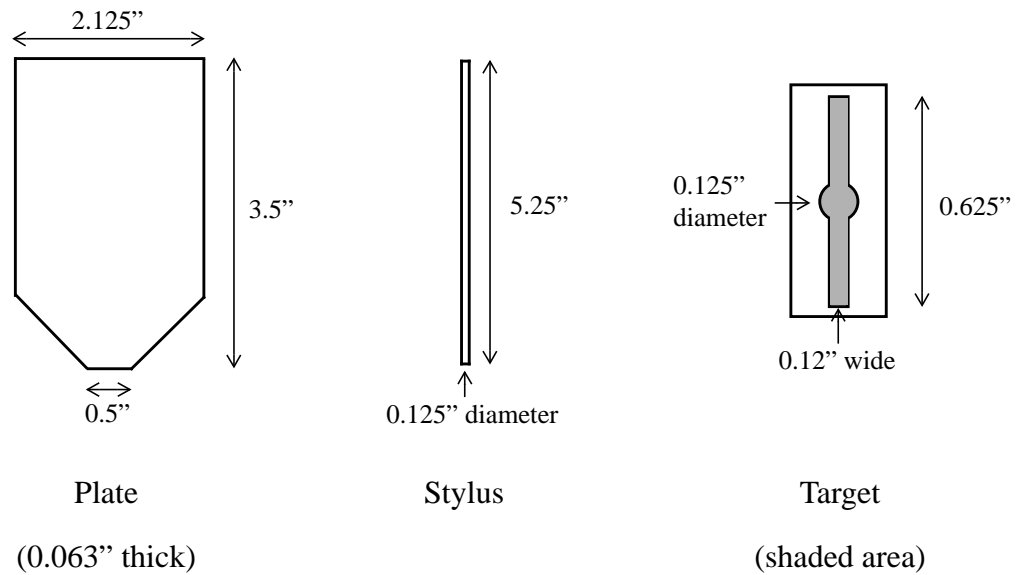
Dimensions of the plate tool, the stylus tool, and target areas.
